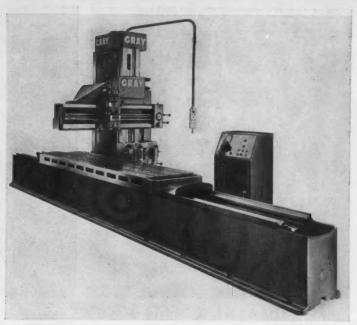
Gray universal planer cuts on both the forward and reverse stroke in addition to handling light cross-keyways and corner chamfers
